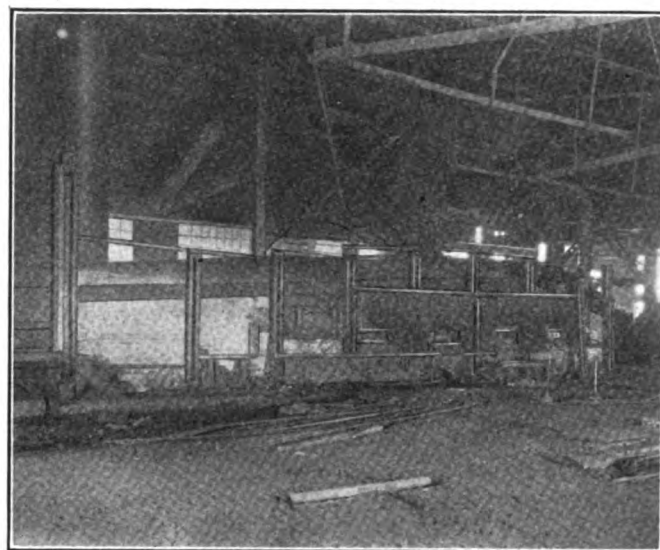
Side of furnace showing the discharging doors—the final discharging door being the second from the right-hand side.
